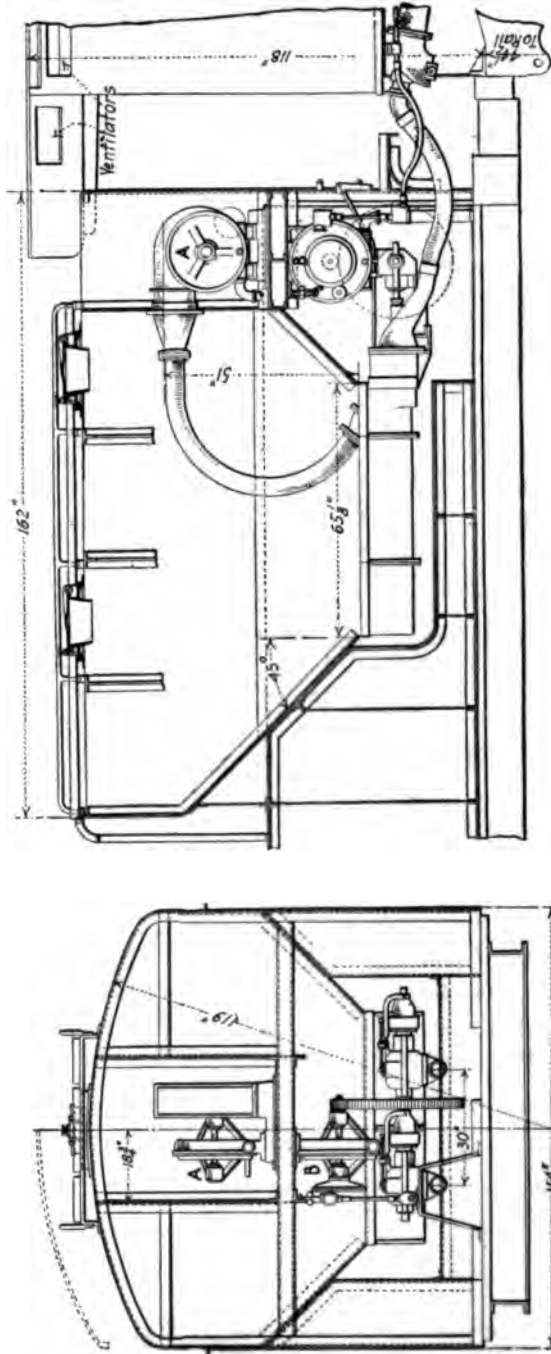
DOUBLE-FEEDER EQUIPMENT AS APPLIED TO TENDER FOR 10-WHEEL TYPE OF PASSENGER LOCOMOTIVE FOR THE CENTRAL RAILWAY OF BRAZIL
